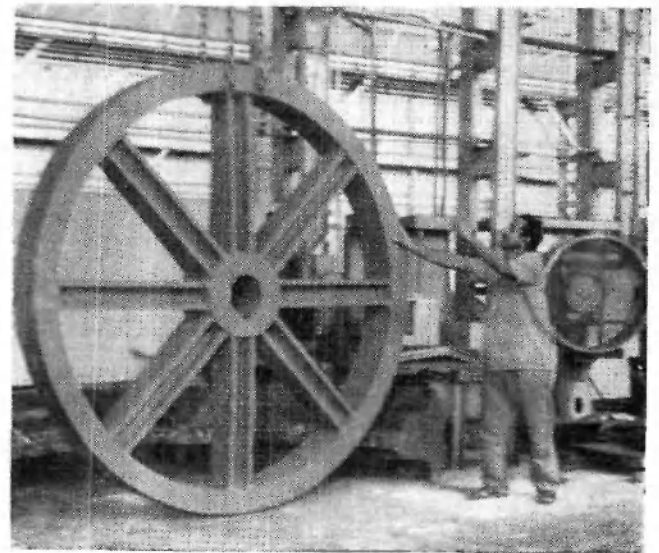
Bull Gear Blank Fabricated for 400T Trimming Press
